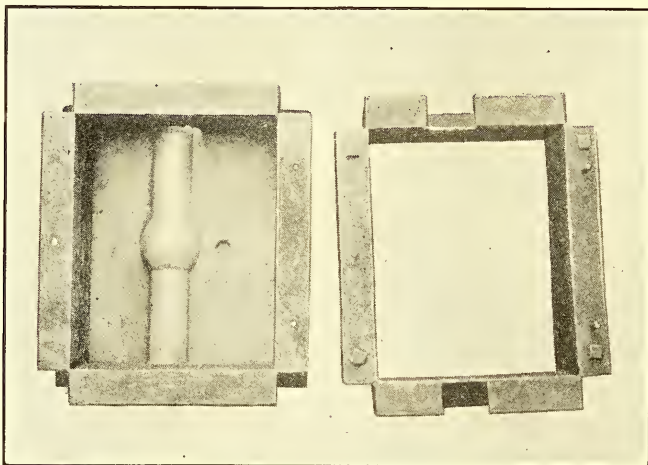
Sheet-Iron Mold Box and Wooden Pattern.
